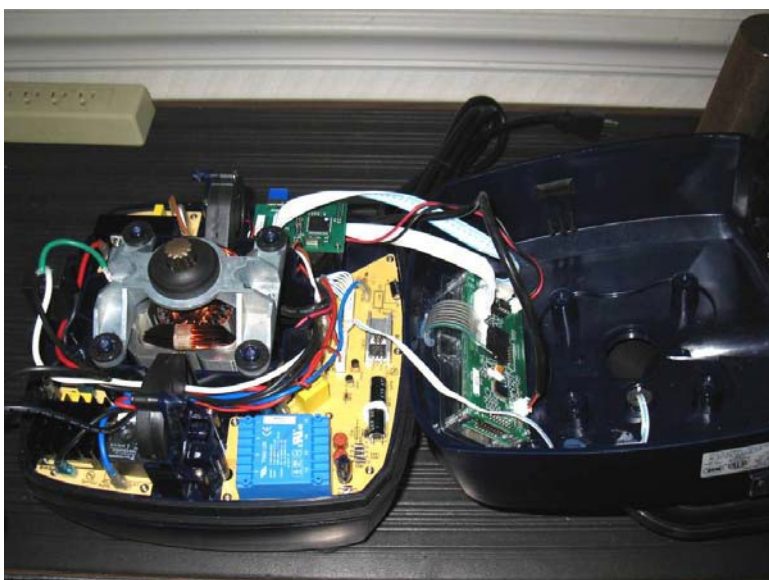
Unit with circuit breaker/on off switch leads disconnected and upper housing positioned to the front of the machine.
